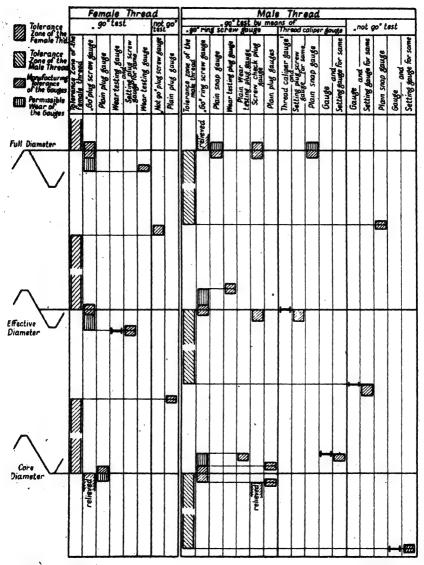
Thread Tolerance Gauging Diagram—German D.I.N. Metric Threads
